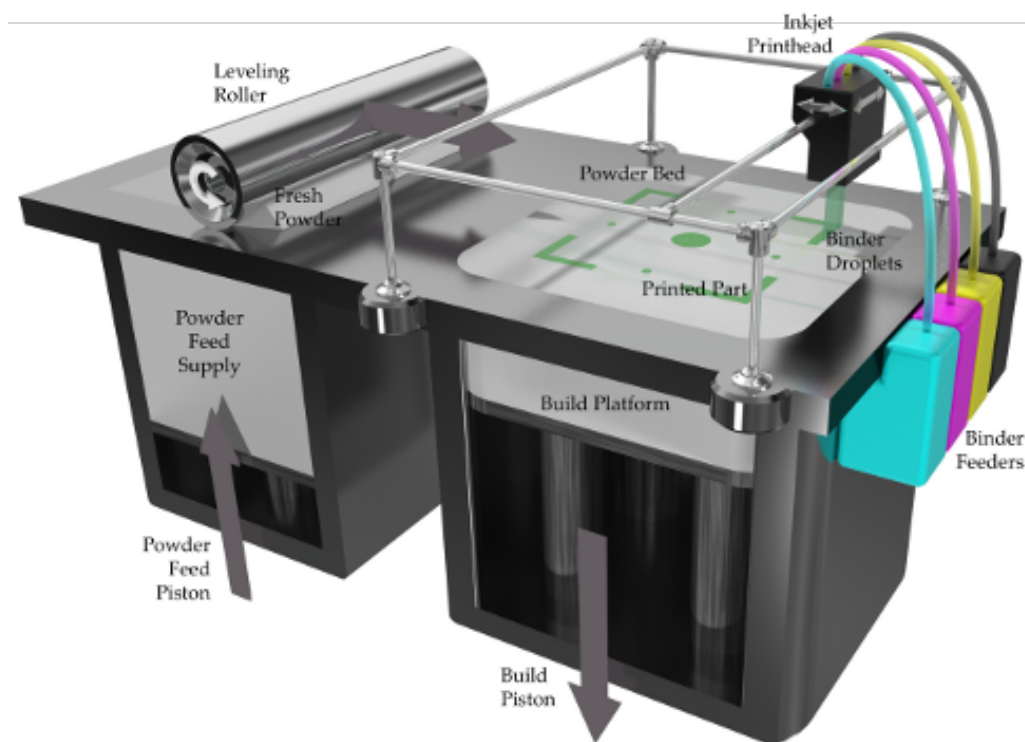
An illustration of a binder jet 3D printer, which uses a roller to spread a metal or ceramic powder from a feed supply to a build platform. An inkjet style printhead selectively deposits a binder, layer by layer, until a part is made.
